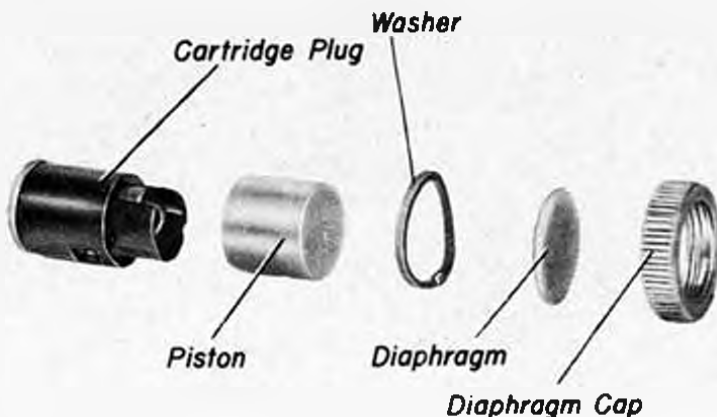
Mk 9 Exploder, Cartridge Assembly
